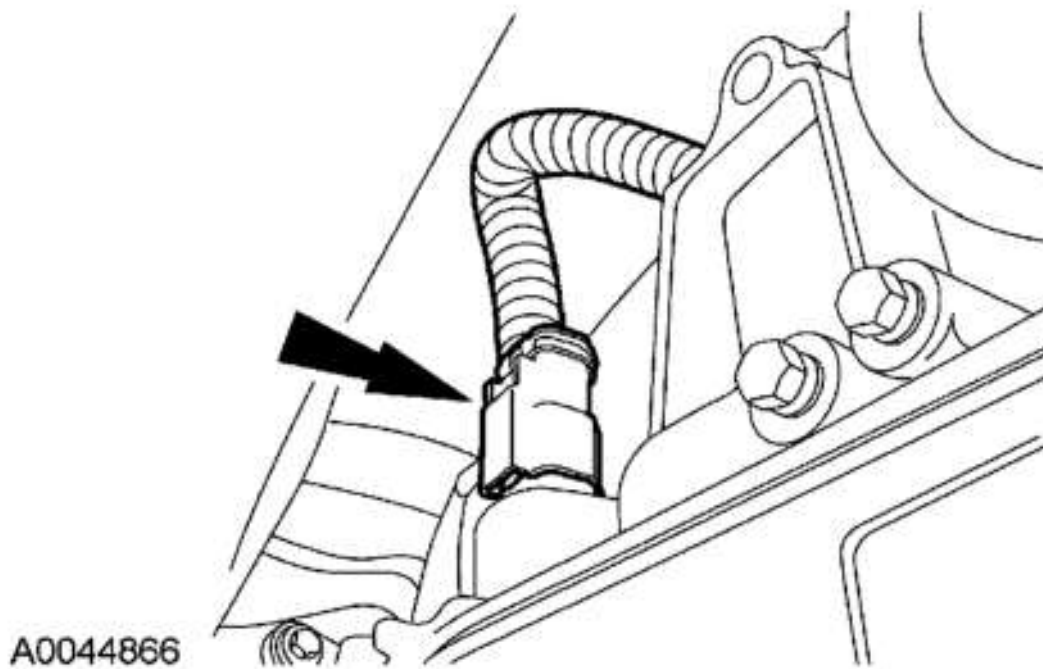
Disconnecting Solenoid Body Assembly Electrical Connector
